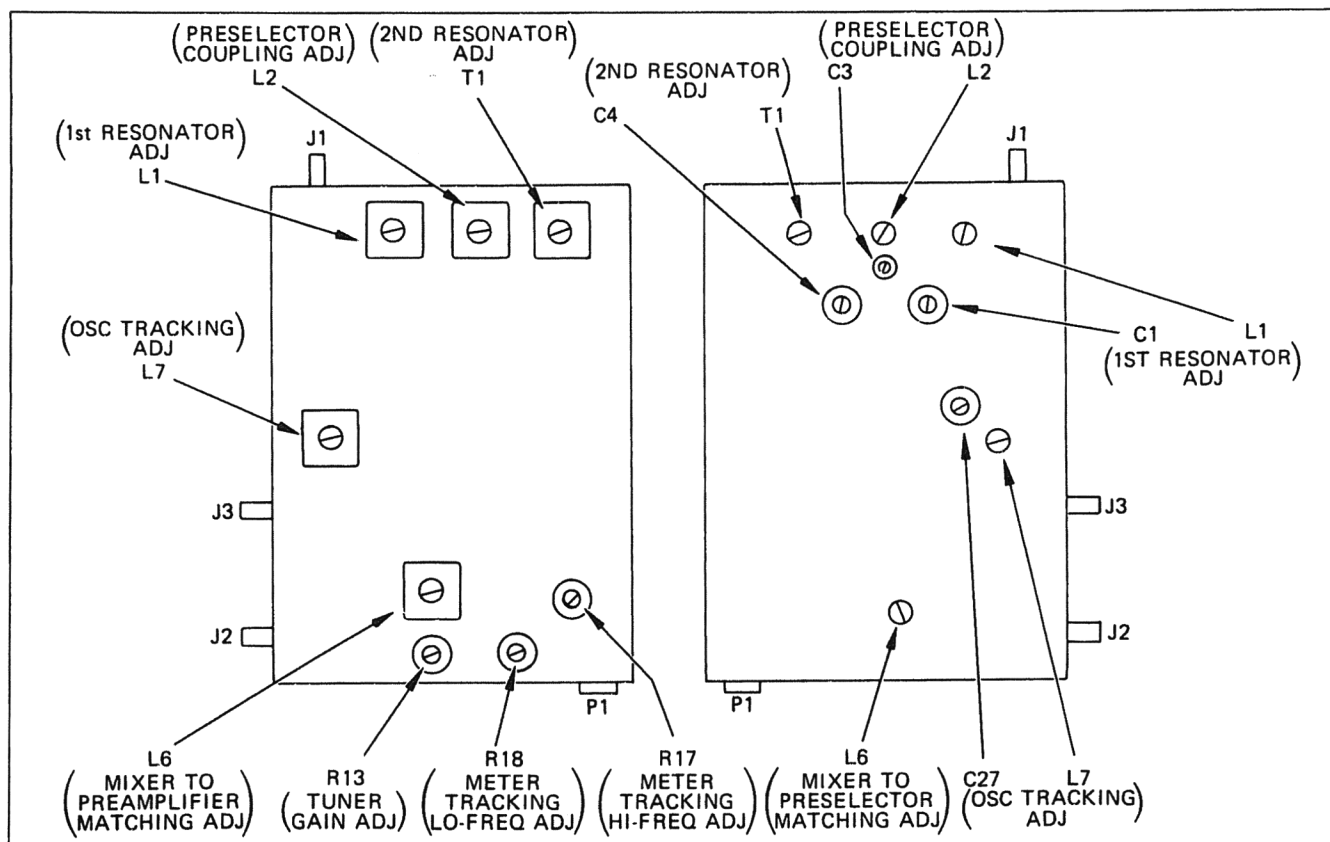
Trimmer Locations, Band 3 Tuner Assembly, A3
